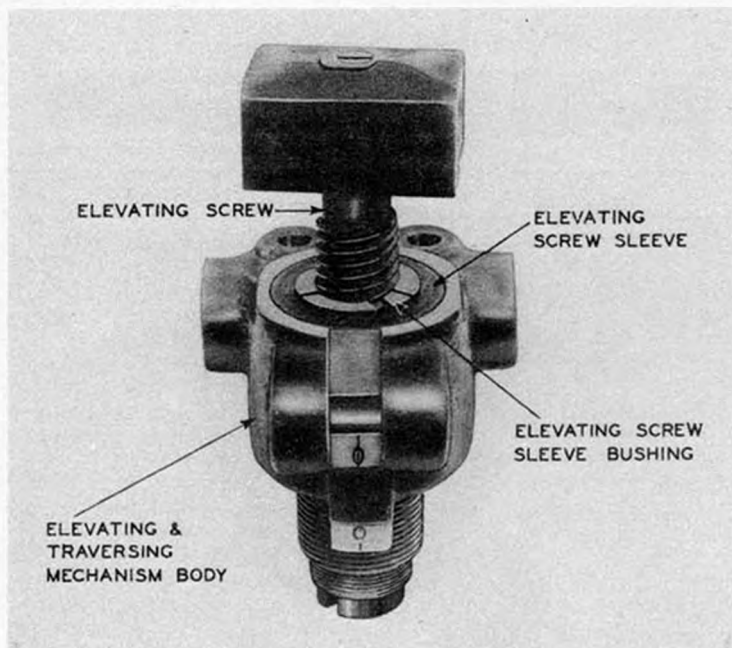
Top view of elevating and traversing mechanism body with elevating screw sleeve, elevating screw sleeve bushing, and elevating screw assembled to the elevating and traversing mechanism body.
